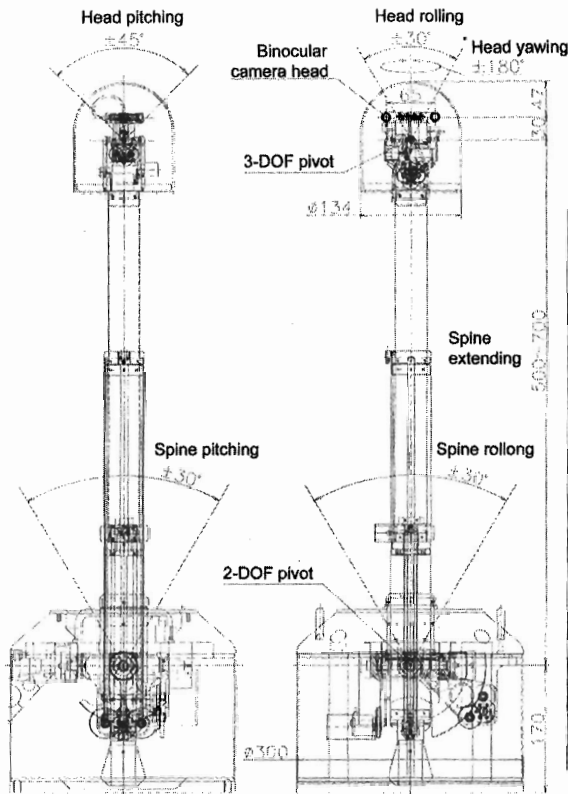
Design of Stereo Camera mounted on Torso Mechanism with 6-DOF.
